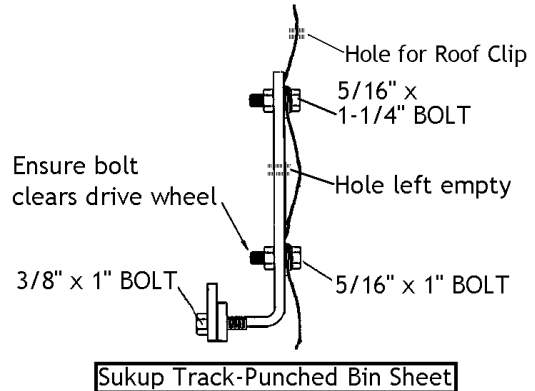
Side View of Track Mounted on Sukup Bin Sheet Punched for Track
